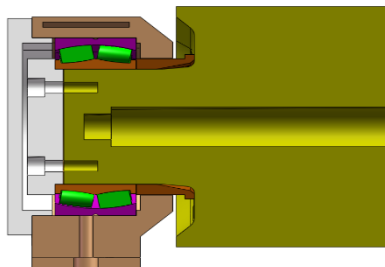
Three-dimensional CAD assembly model of the continuous casting roller (section view)
